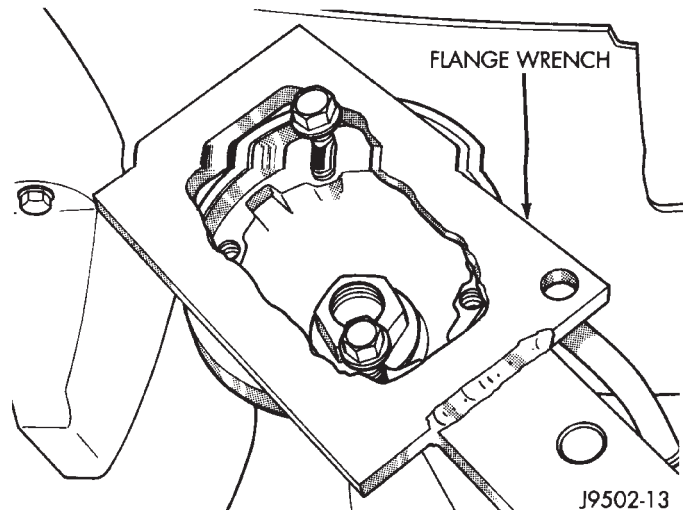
Tightening Pinion Nut with Type 3 Shaft HUB BEARING AND AXLE SHAFT
